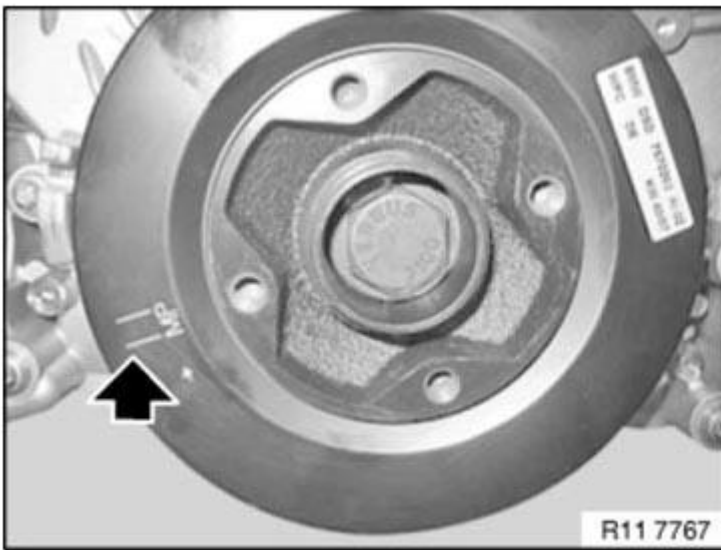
Identifying Mounting Position Of Special Tool 11 8 570
